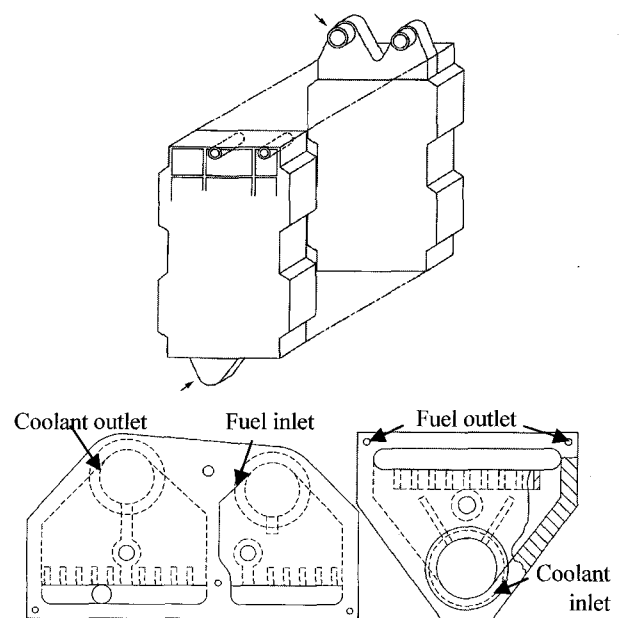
Positive/negative end plate assembly with header (top), detailed view of the header in positive (bottom left), negative end plate assembly (bottom right) (modified from Ref. 15)
